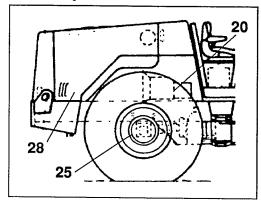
Bolted joints 20 Pumps 25 Rear axle 28 Engine
